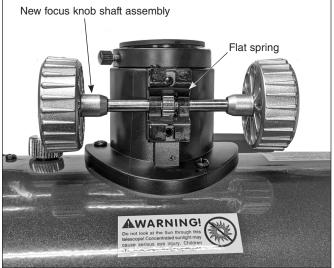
Take the new focus knob shaft assembly included in this kit and place it on the focuser. Be sure the rack and pinon gears are aligned. Next, place the flat spring over the shaft so that the curved portion bends inward as shown in the image above. If the flat spring is placed backwards you will not be able to re-install the cover plate as described in the next step. Reseat the cover plate and re-tighten the Phillips head screws in reverse of step one. It is recommended to alternate the screws you are tightening every couple of turns to ensure they are equally tightened.
